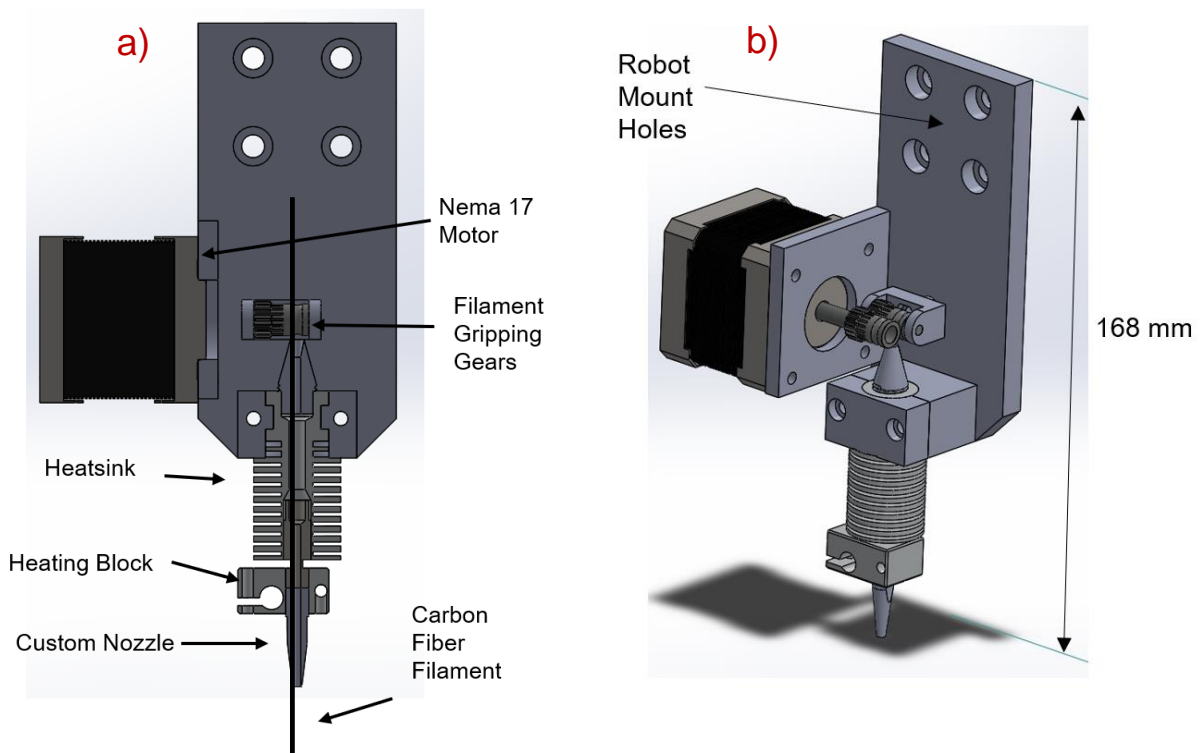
CAD diagram of new extruder a) cross sectional, and b) isometric.
